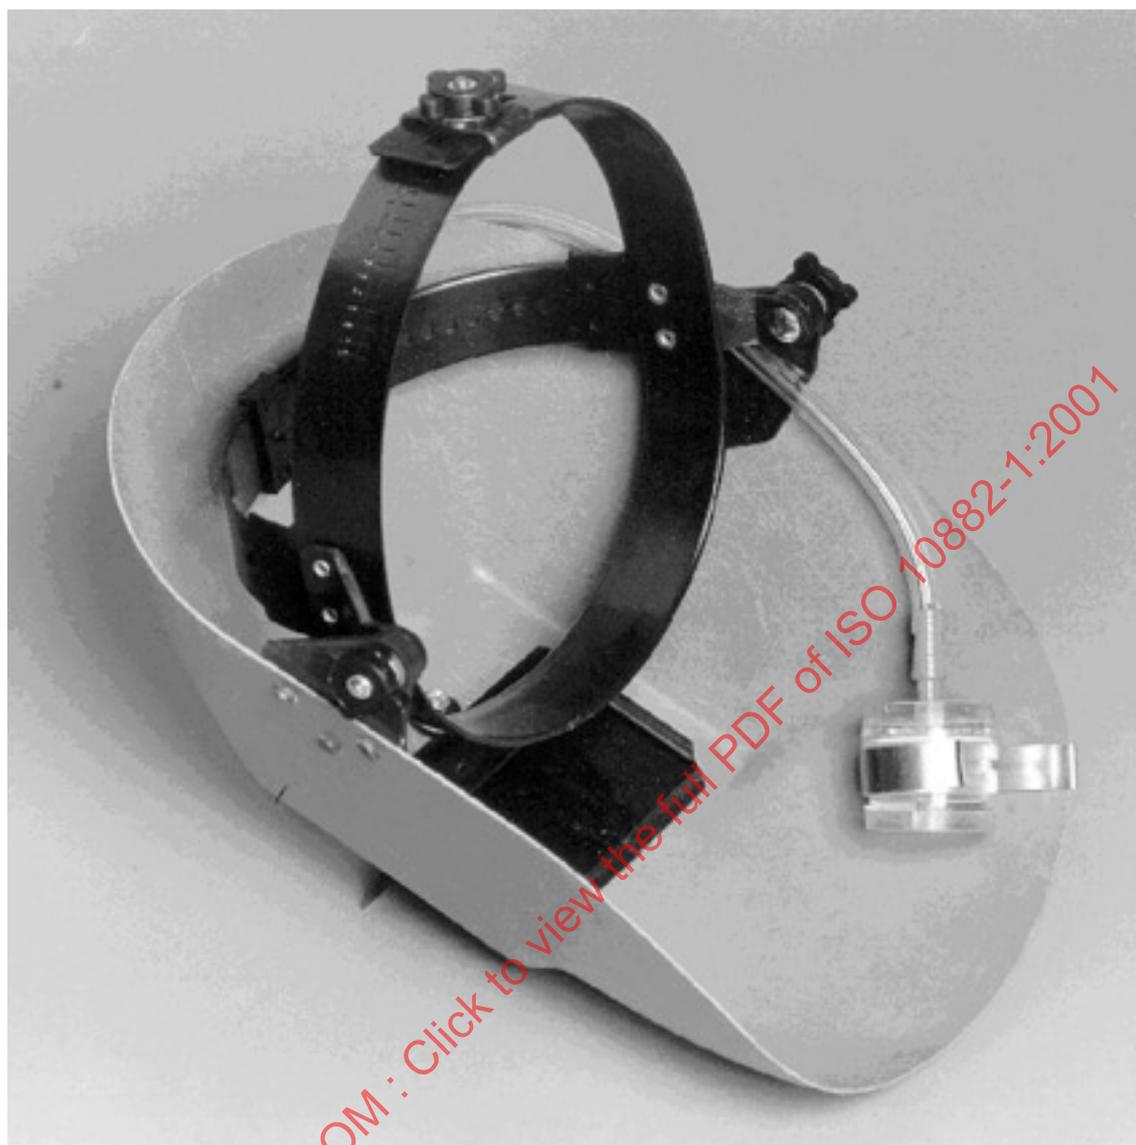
Welder's face shield with a sampler attached by means of a removable clip (see figure A.1.3)
